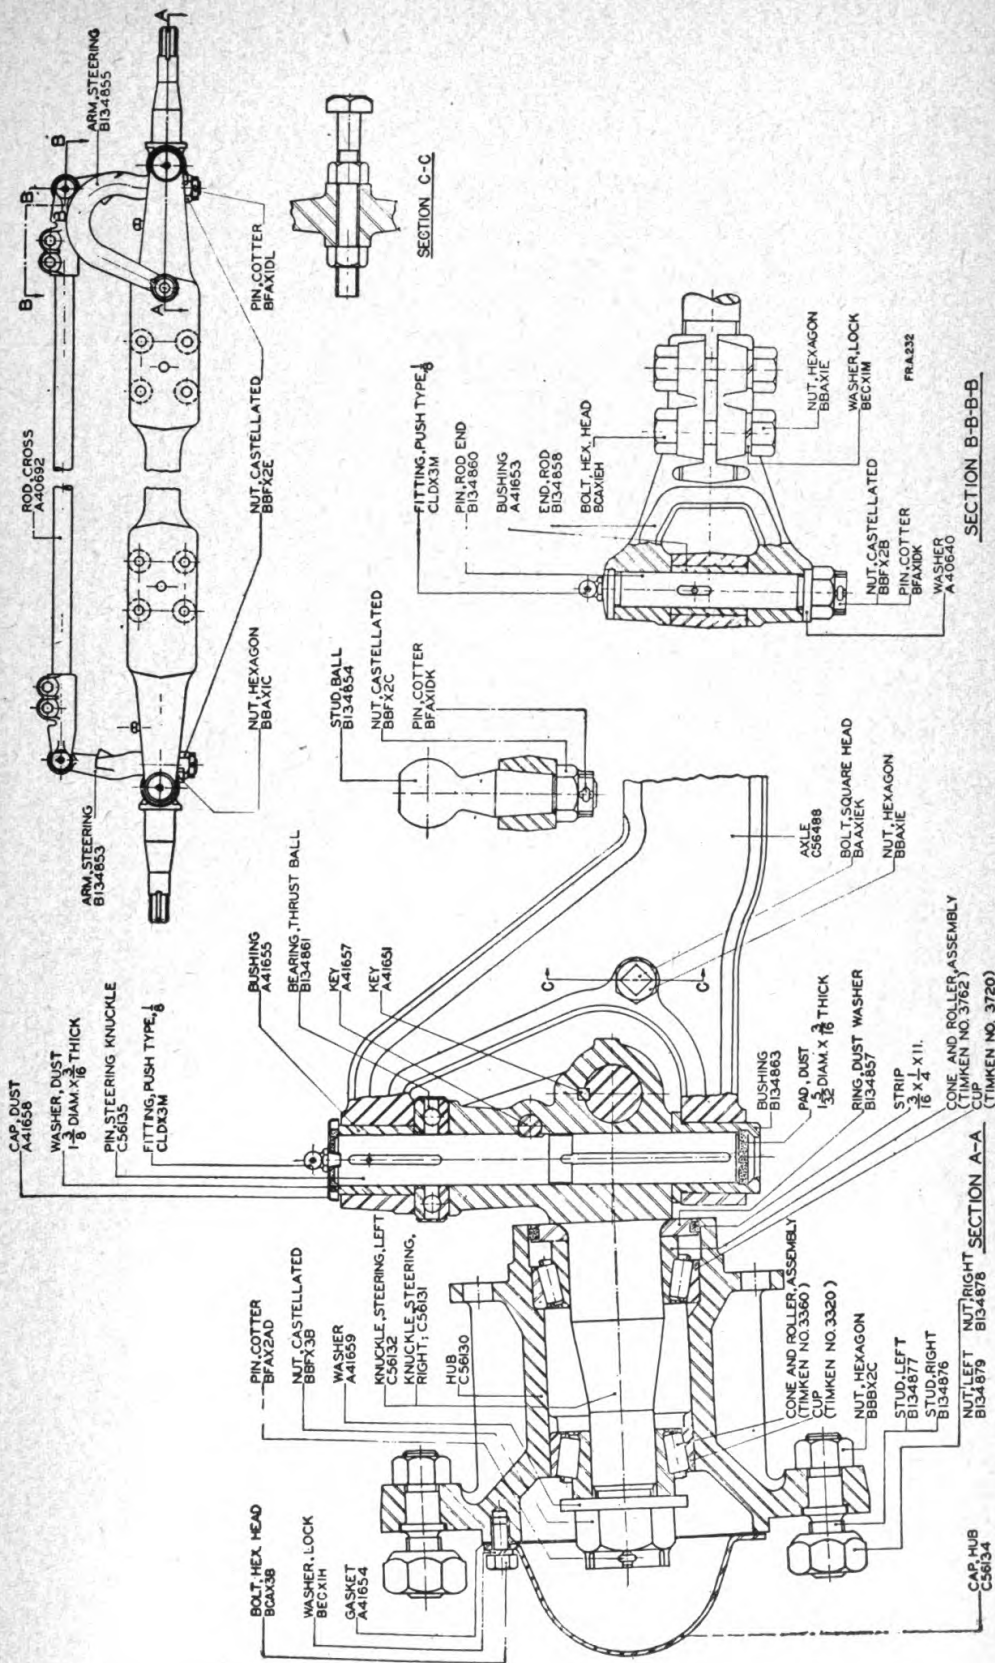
Sound locator trailer, M2A1 and M2A2—front axle—assembled and sectioned views.
